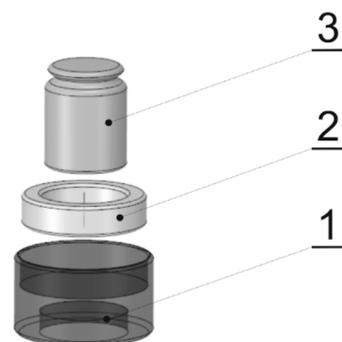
View of the disassemblable sample pusher: 1—sample and weight seat, 2—reduction ring, 3—weight.
